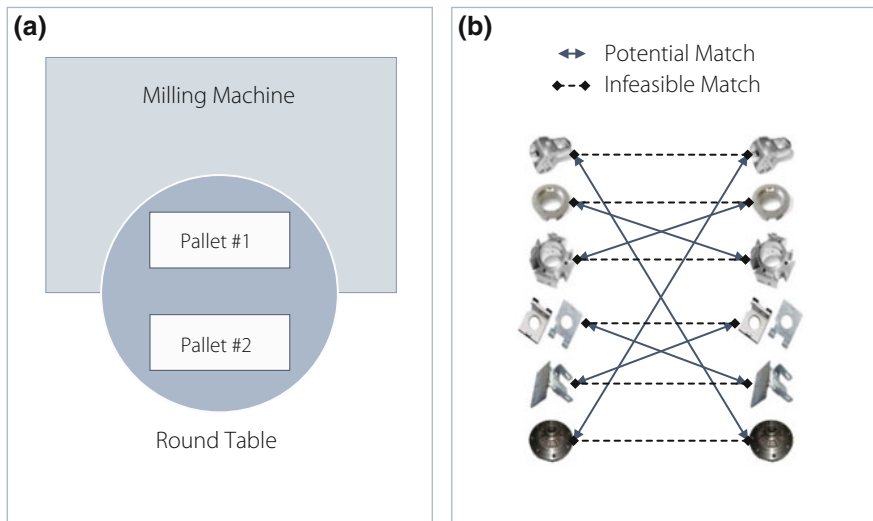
a Double-part milling machine configuration (courtesy of Kirby Risk Precision Machining)—Pallets #1 and #2 are under the machining and loading processes, respectively. b Examples of potential and infeasible matching. A work-piece cannot be matched to itself. The matching is “symmetric”; i.e., in matching I_L (left-side set) and I_R (right-side set), matching $A \in I_L$ and $B \in I_R$ implies matching $B \in I_L$ and $A \in I_R$ as well
